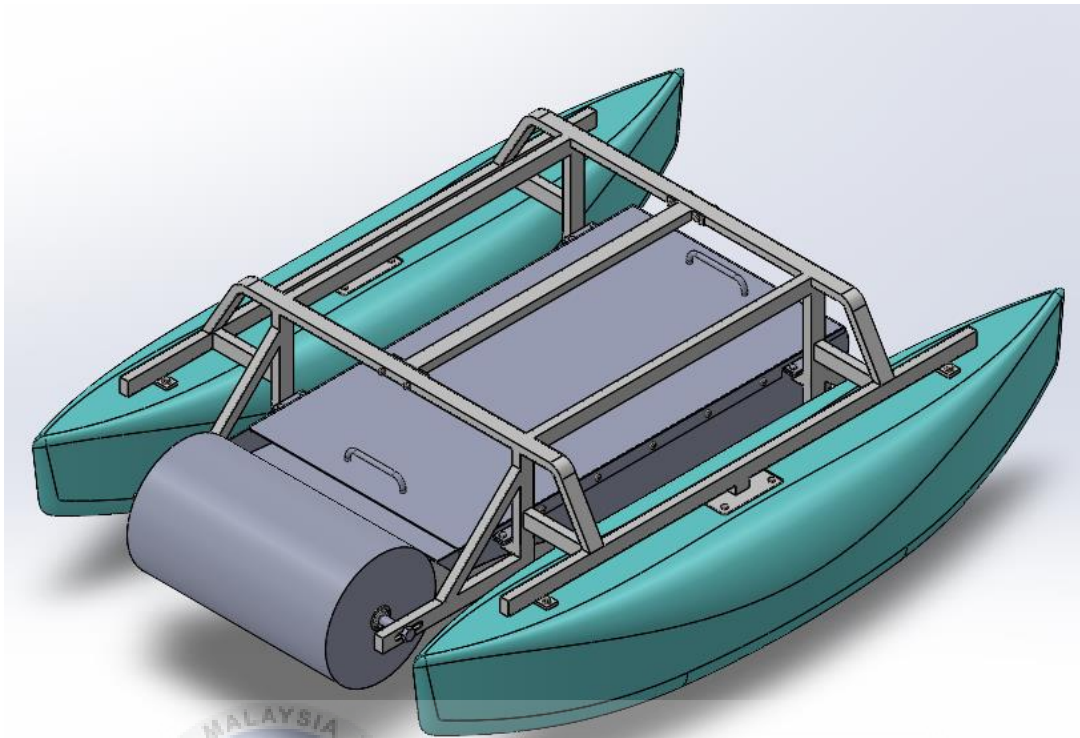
Partial Assembly of Portable Oil Spill Skimmer
